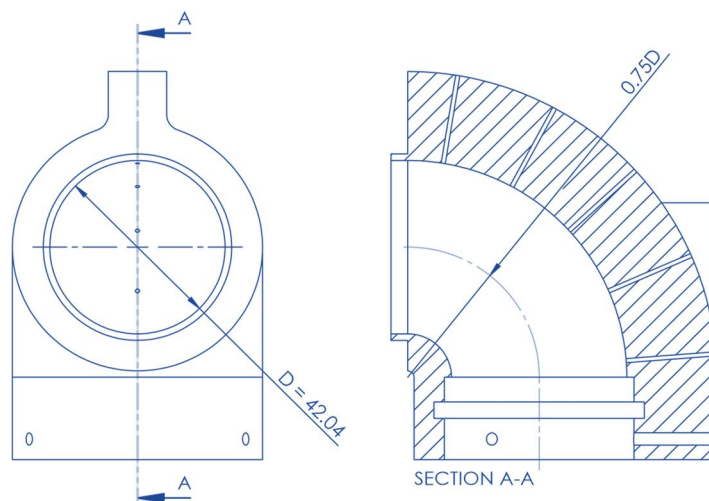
The 0.75D elbow inlet is meant to fit into the compressor intake adapter and contain the linear thermocouple array, as shown in this mechanical drawing.
